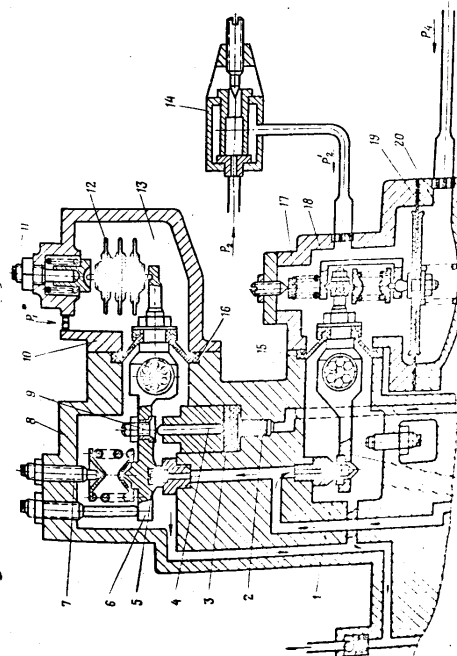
Afterburner Governor and nozzle of HP-118A Pump
